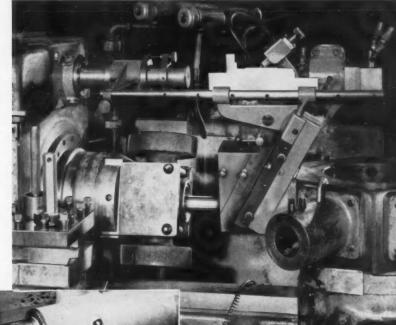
(Left) Hydraulic automatic lathe has front-mounted template, with tracer slide and control unit located on the front carriage, for turning and facing multiple-diameter work-pieces
